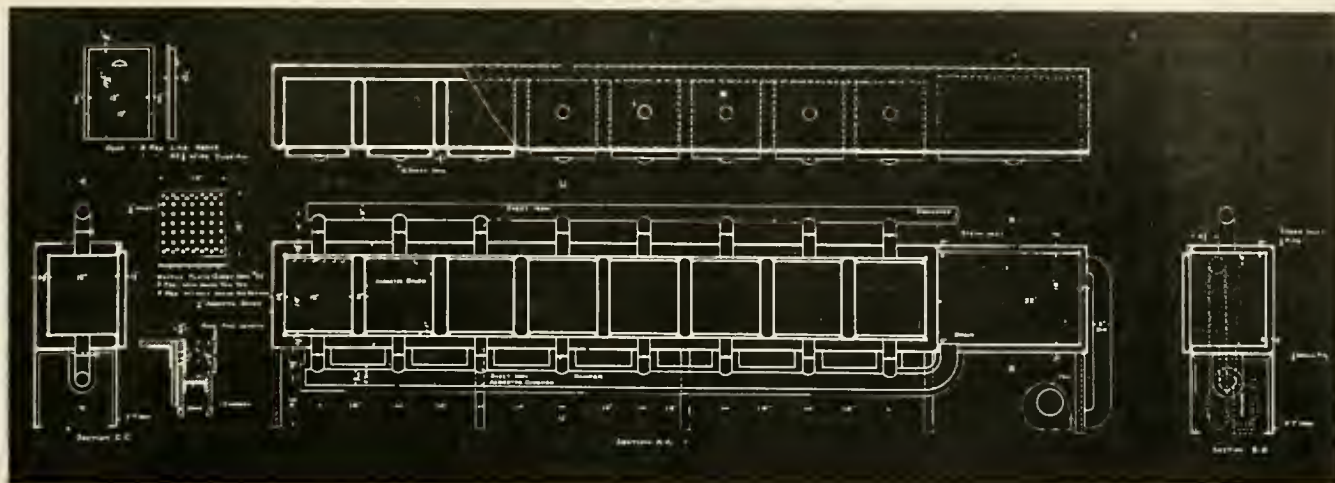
PLAN AND ELEVATION OF AGE-TESTING APPARATUS
